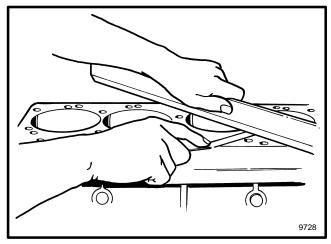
MEASURE THE CYLINDER LINER POSITION
